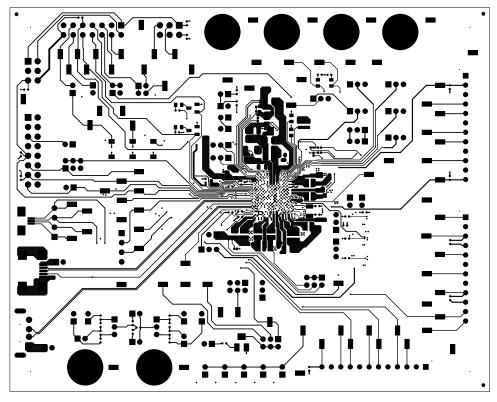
KIT34708VMEVBE (Rev. B) Top Layout Layer
